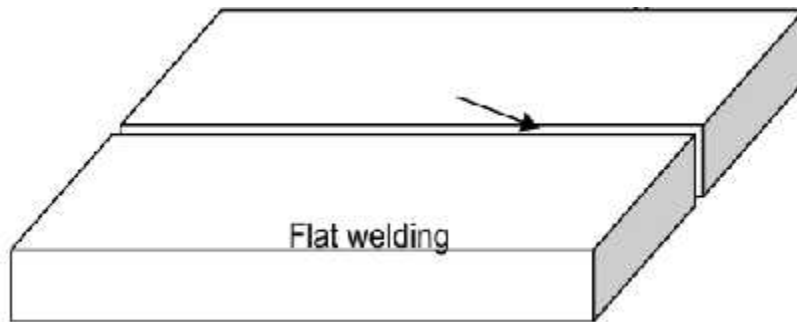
Scheme of placement of components to be welded for flat welding
